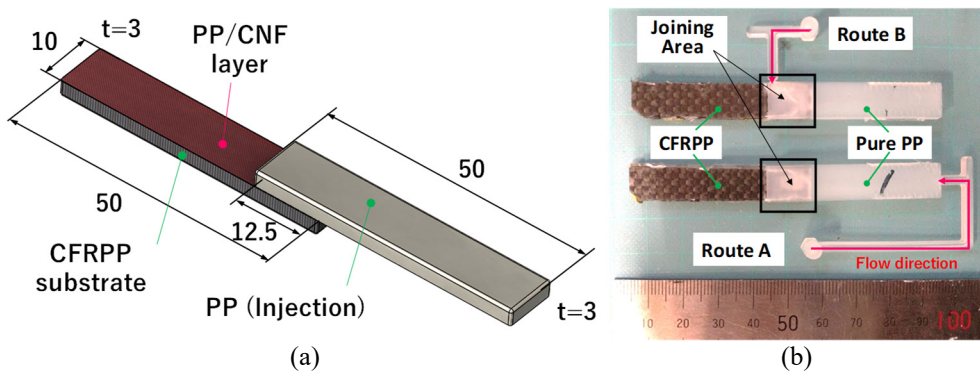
Single-lap joint. (a) A schematic drawing of specimen and dimension; and (b) Moulded specimens by changing runner route (lower: route A and upper: route B).
